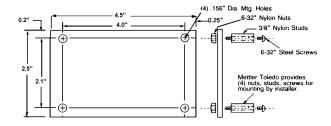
PCB Size and Mounting Hole Dimensioning
